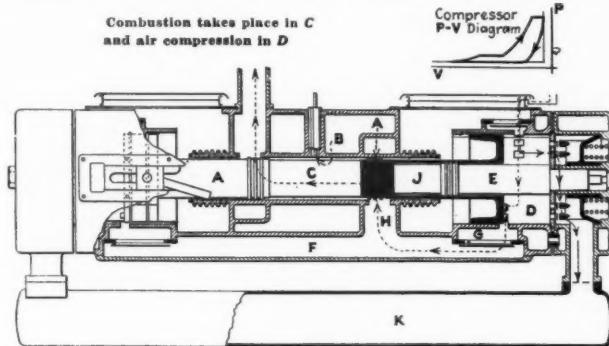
FREE-PISTON ENGINE COMPRESSOR
